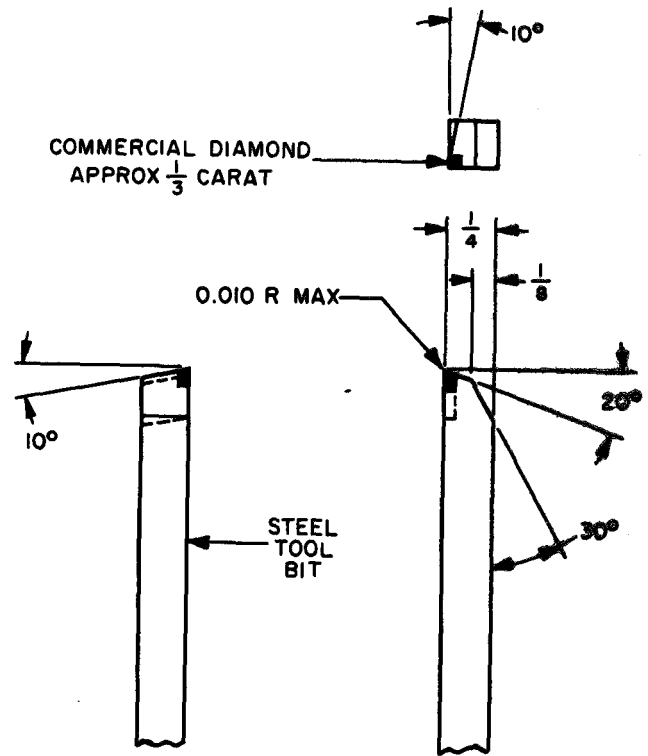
Fabrication of Diamond-tipped Cutting Tool.
